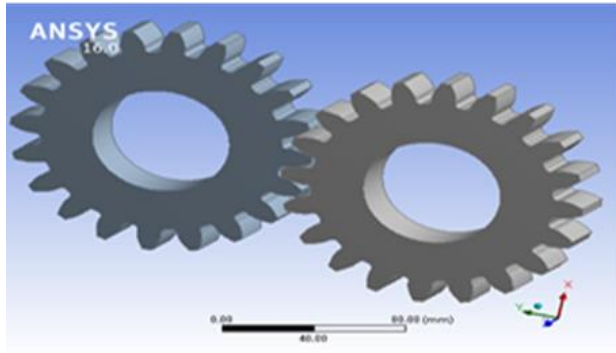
Spur Gear 3D CAD Model in ANSYS
